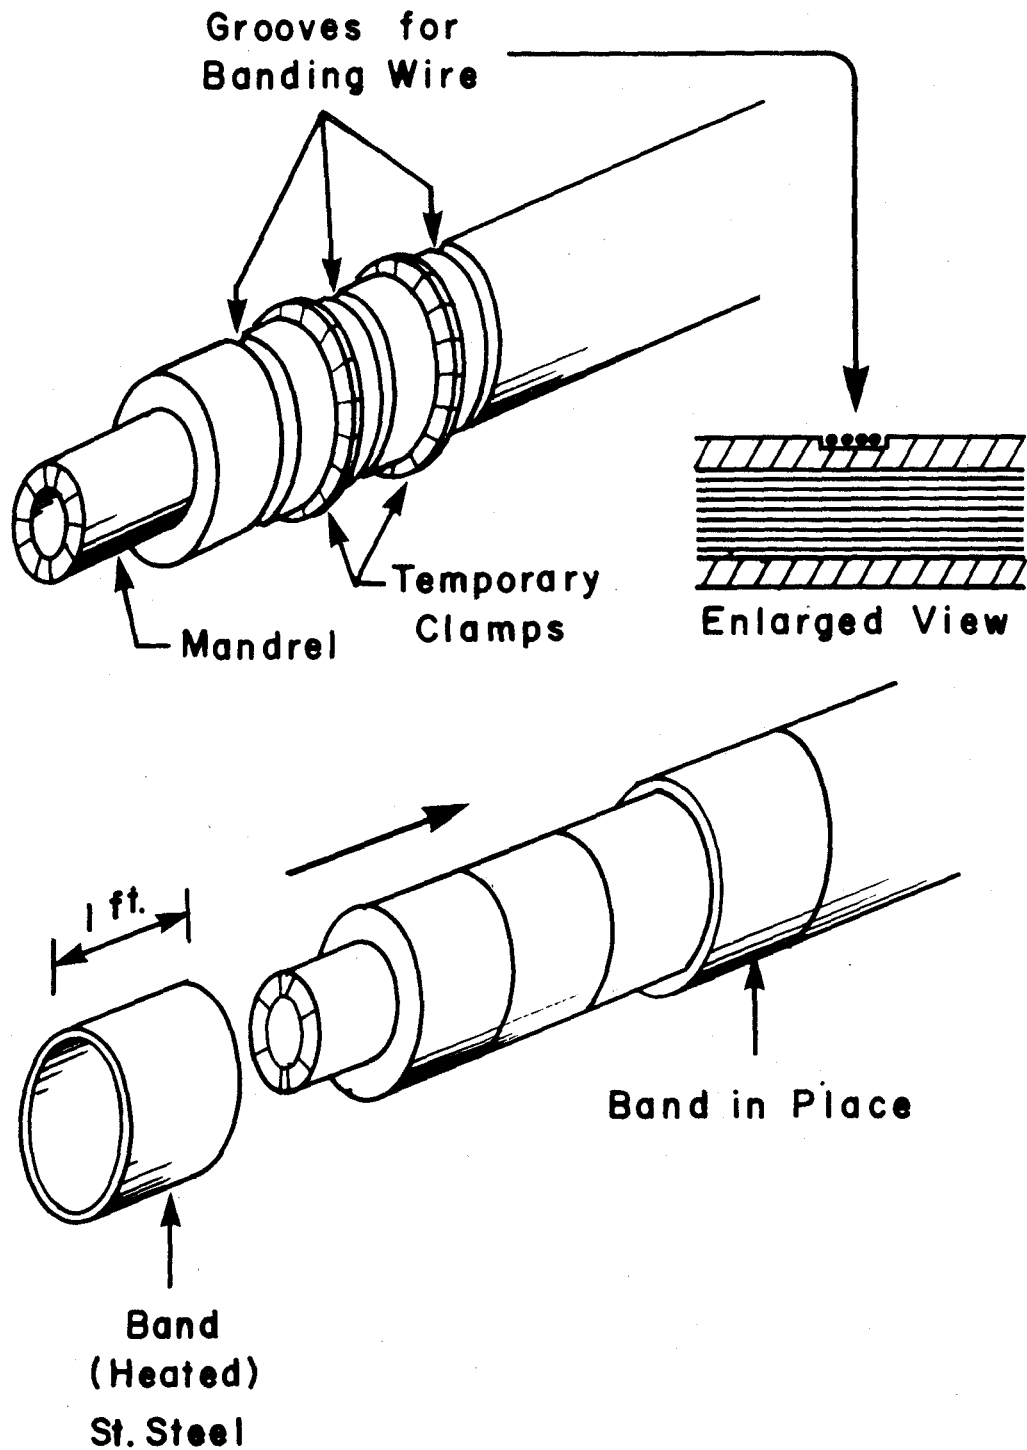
Assembly with Final Banding. Upper View Shows Wire Bands Added. Lower View Shows Temporary Clamps Removed and Stainless Steel Bands Being Shrunk On.
